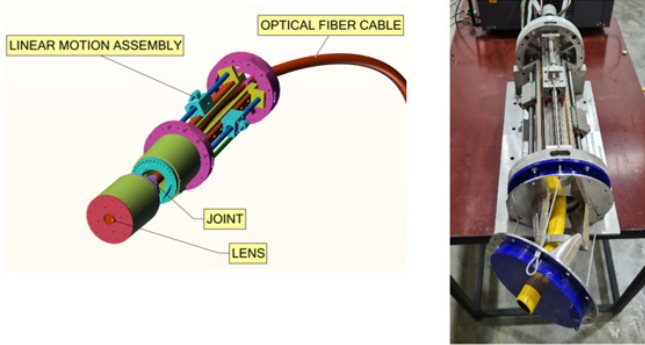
Prototype manipulator for maneuvering the lens bundle.
